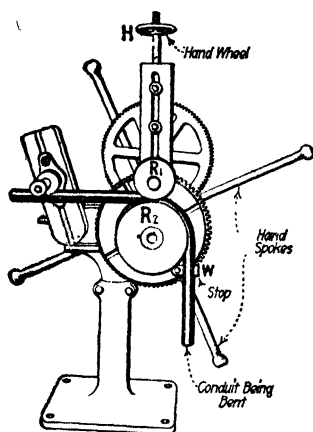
Forming a right-angle, 5-in. radius bend in $1\frac{1}{2}$ -in. conduit. (Note the hand wheel, *H*, on the top of the close-radius attachment which is used for imposing pressure on the roll *R*₁.)
